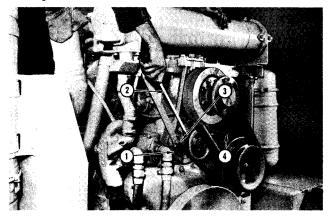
WATER PUMP BELT ADJUSTMENT 1. Clamp Ring 2. Screwdriver 3. Water Pump 4. Drive Belt
